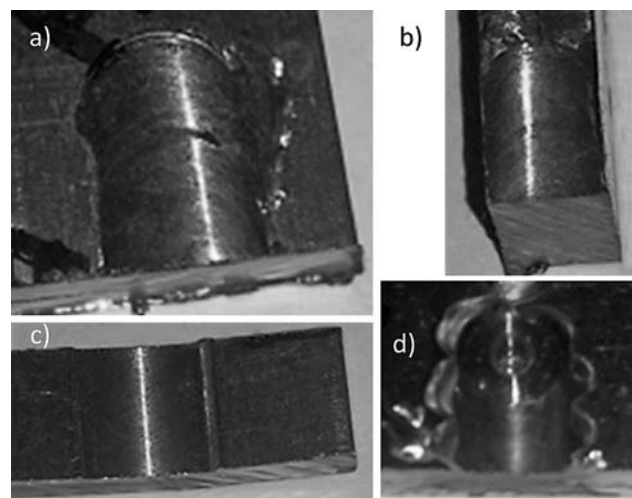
FSW weld surface appearance: a) lap joint (tool B, RPF = 20,4 rev/mm, 93 mm/min, 3°), b) butt joint (tool D, RPF = 135,7 rev/mm, 14 mm/min, 5°), c) butt joint (tool C, RPF = 20,4 rev/mm, 93 mm/min, 3°) and d) butt joint (tool D, RPF = 135,7 rev/mm, 14 mm/min, 5°)
